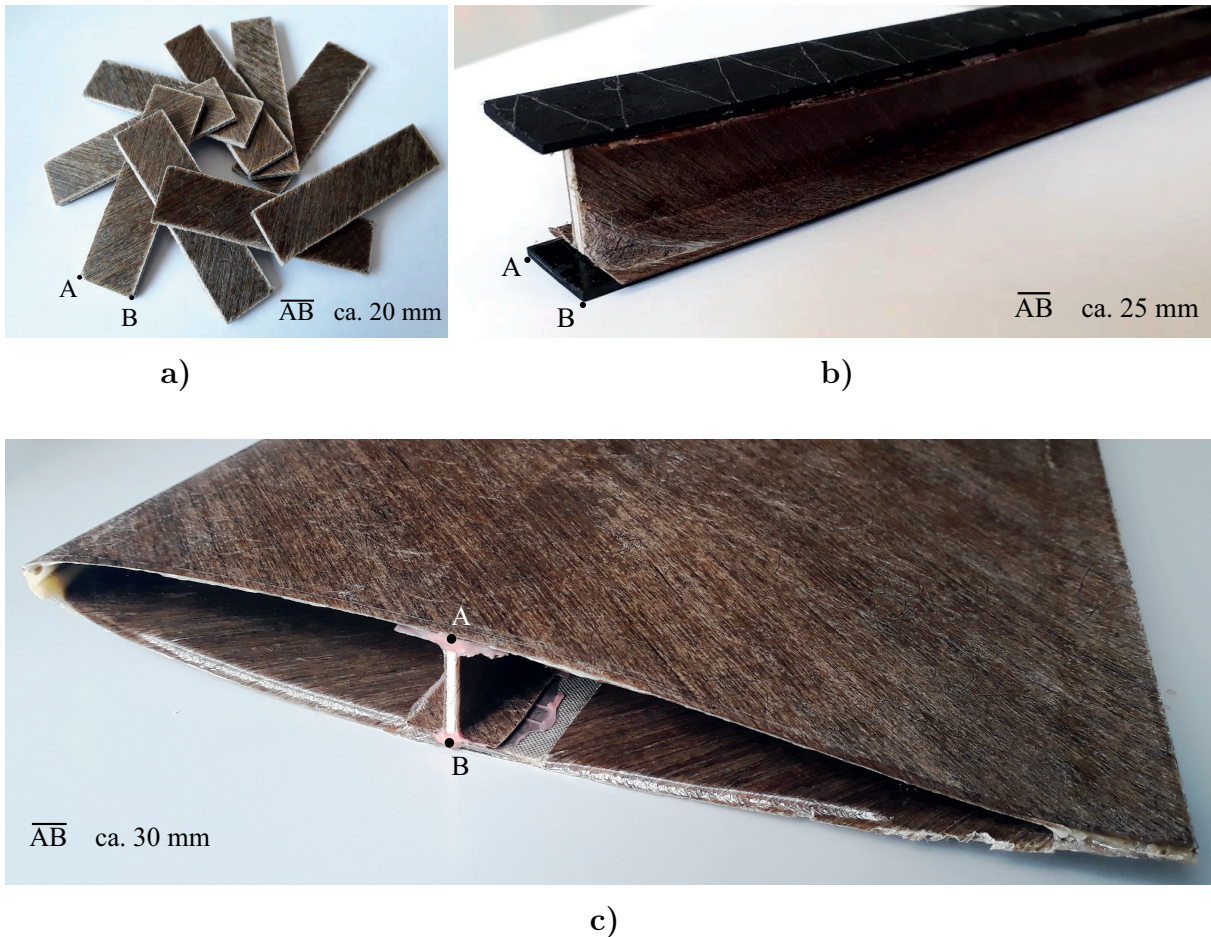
Photographs of Manufactured Parts: a) Sandwich Beams, b) Spar, c) Tailplane Section
